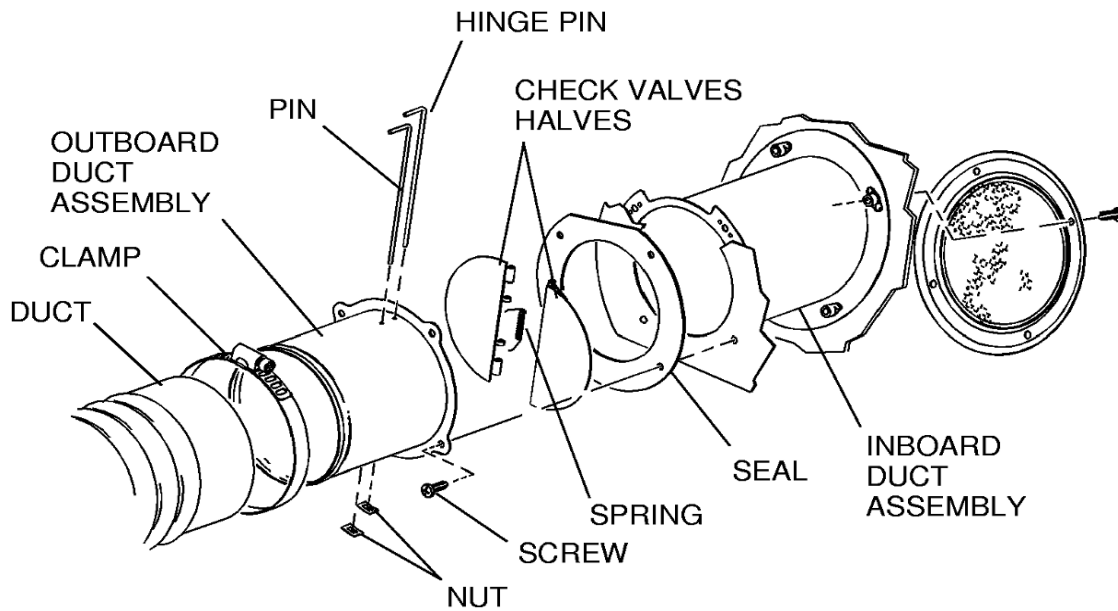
Sheet 1 : Wing Mounted Return Air Check Valve Assembly
